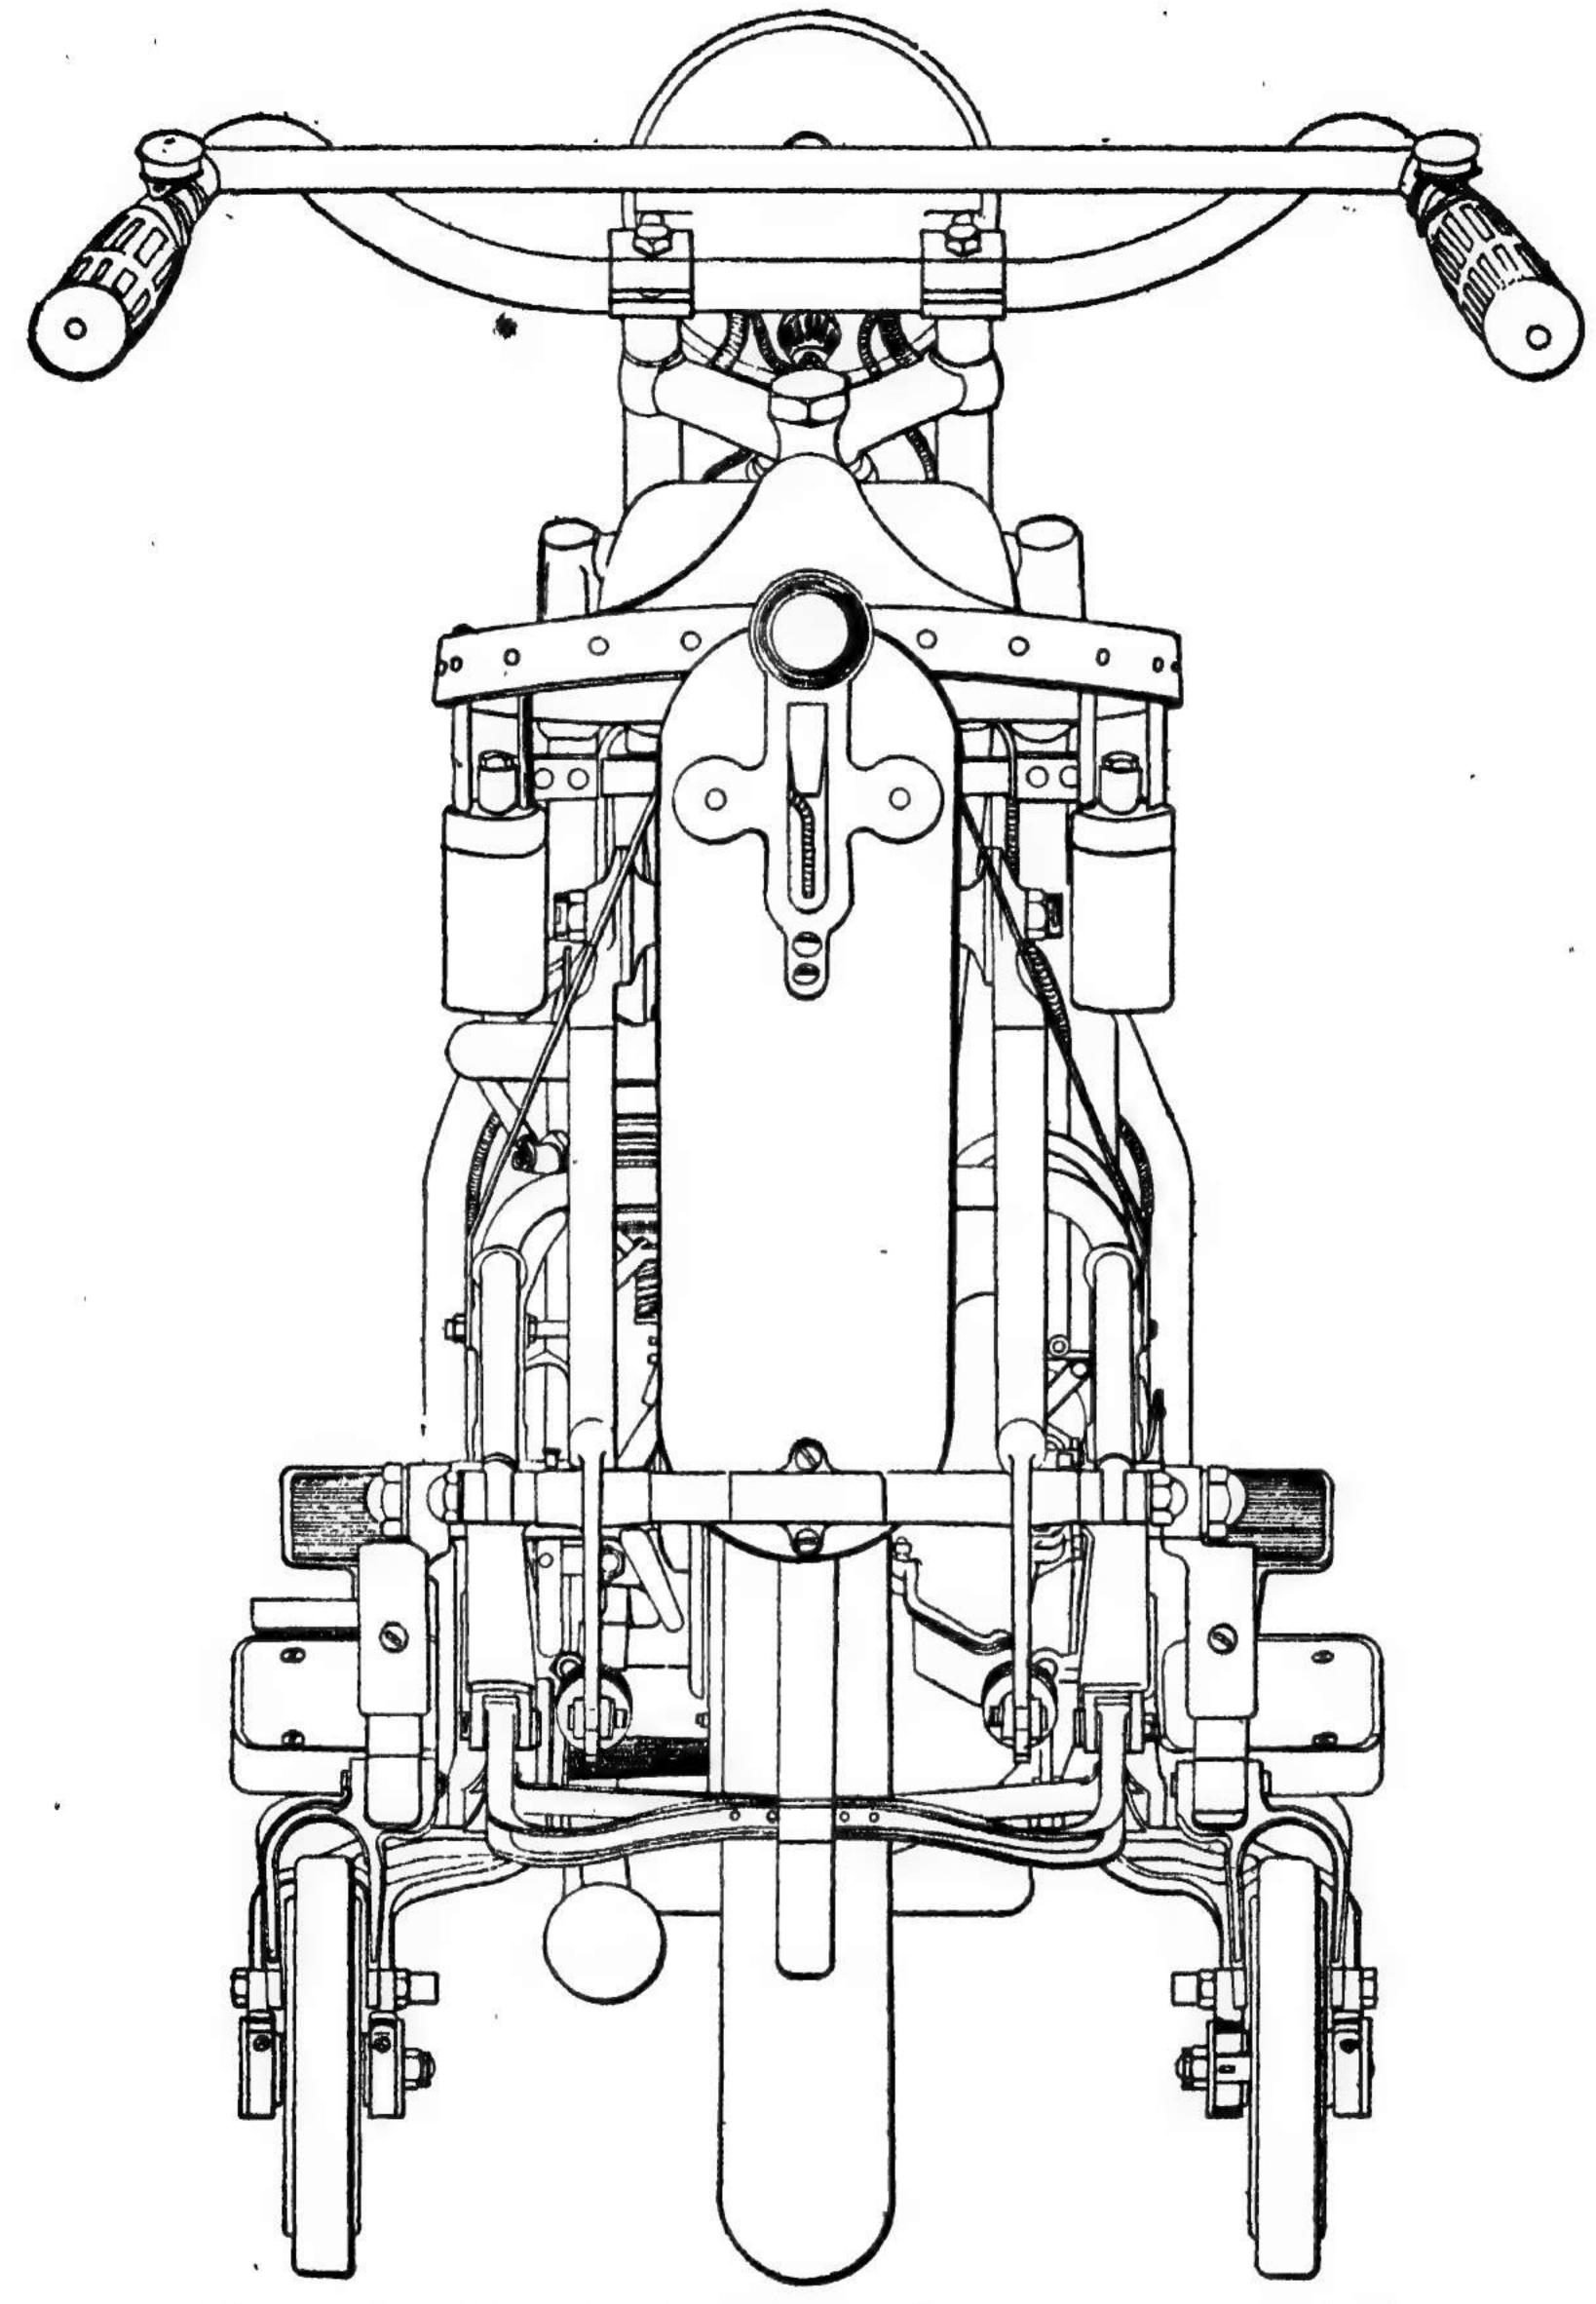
Rear View of Militaire Motorcycle, Showing Auxiliary Wheels in Position for Supporting Motorcycle
